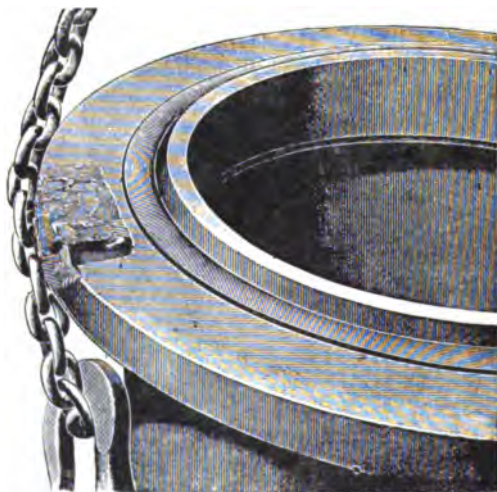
Repairing of a defective steel casting, showing piece cast on
